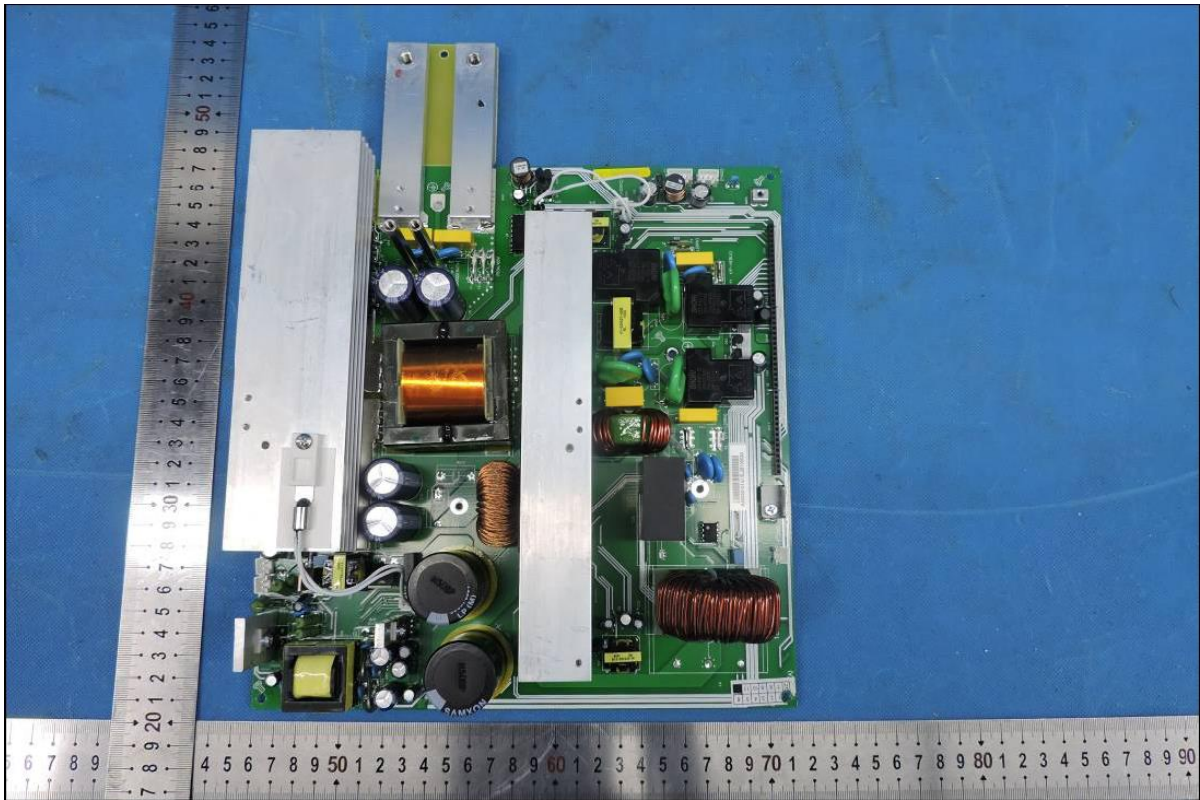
PCB of main board components view(FlinInfini Lite 1kW-12V)
